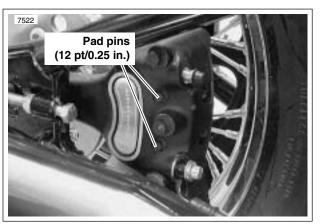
Pad Retaining Bolts (Rear Caliper Shown)
